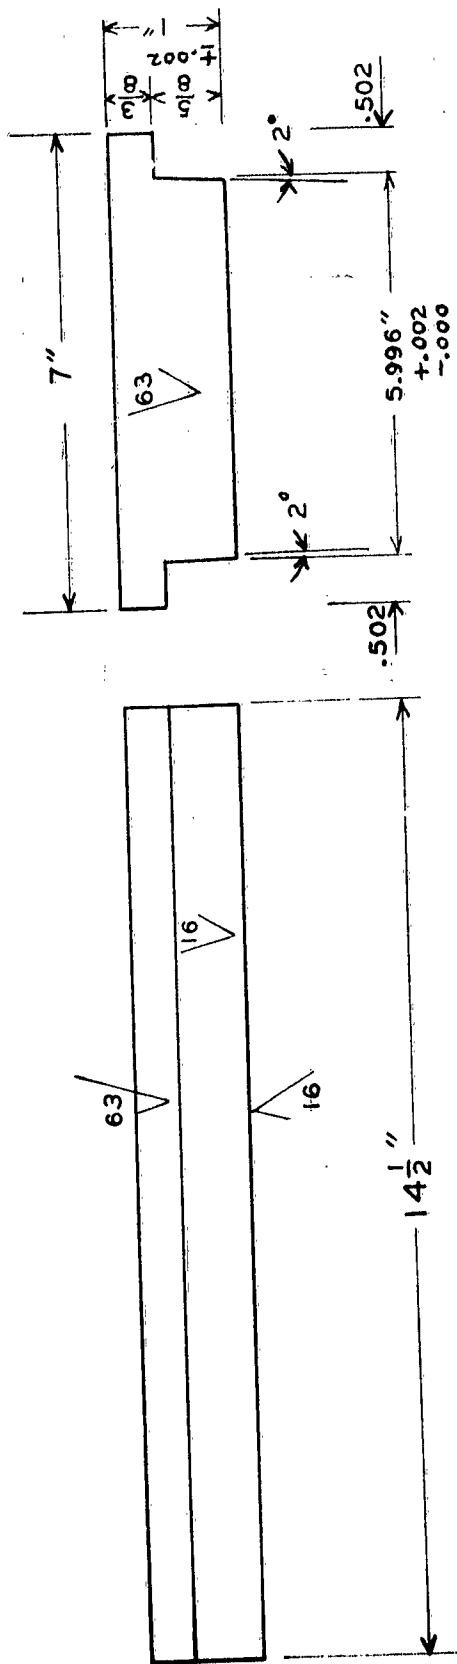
Parallel Strand Specimen Mold: Male Mold Section (2 required)
